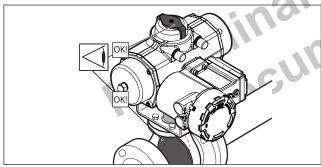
Check proper mounting before connecting air supply and electrical wiring.
